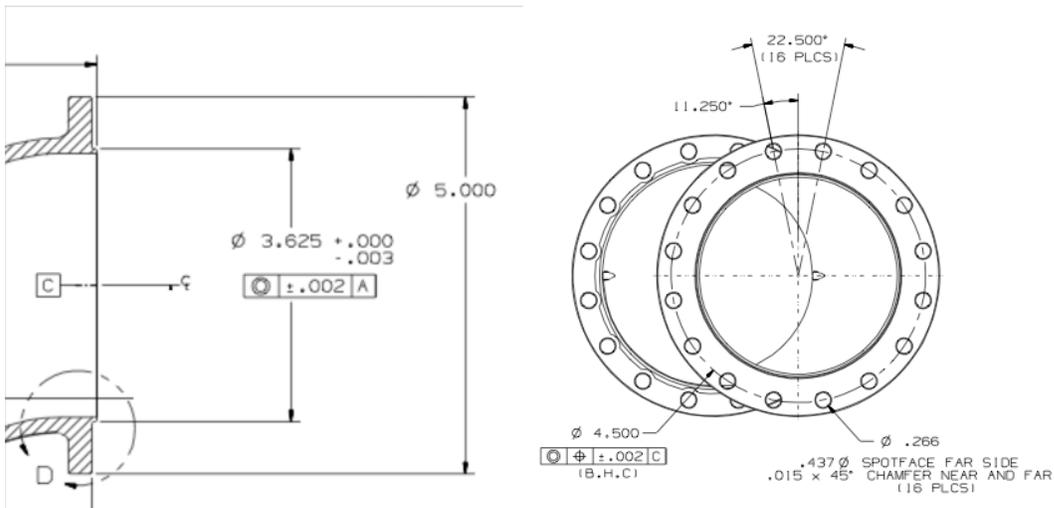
PARTID DS2TJ—REFERENCE DRAWING OF DOWNSTREAM FLANGE DETAILS FROM SIMILAR PART
